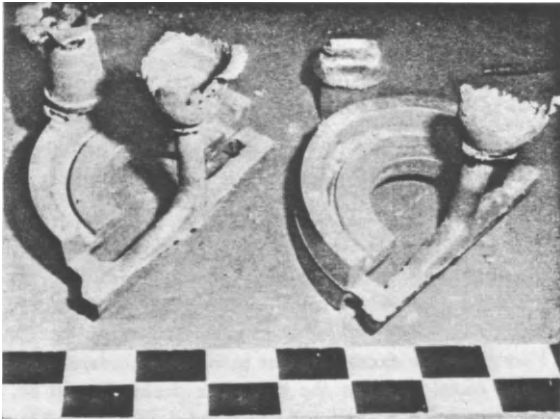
Half wheel, manufactured with inside exothermic pads, similar to the example shown in Fig. 438. Here also two preliminary trials were necessary. A very large number of radiographically sound castings was manufactured by this method. (By courtesy of Sulzer Bros., Winterthur.)
